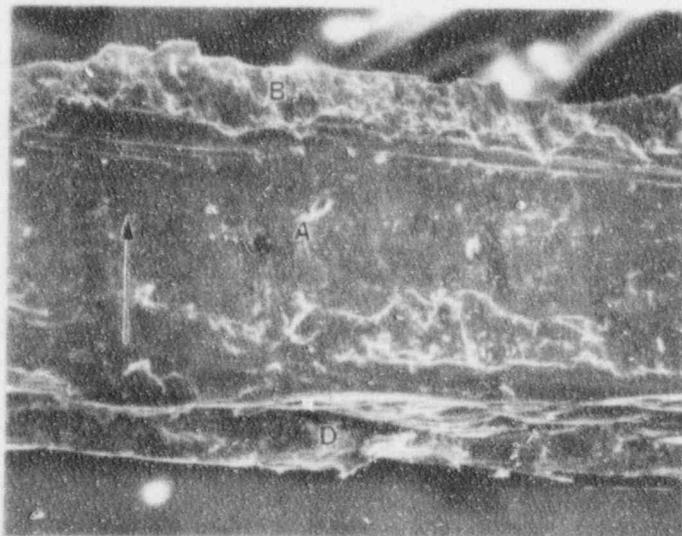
SEM fractograph of the stripped threads obtained by overtorquing, illustrating the presence of three distinct zones, a tearing zone (D), a rubbed zone (A), and a shearing zone (B), at 150 X magnification.
